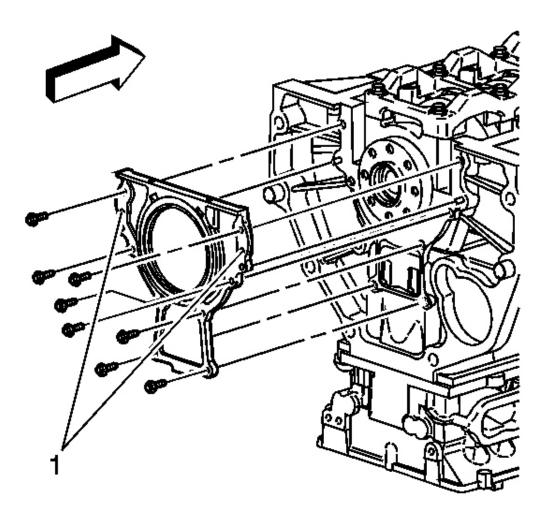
View Of Crankshaft Rear Oil Seal Housing, Bolts & Threaded Holes Courtesy of GENERAL MOTORS CORP.
